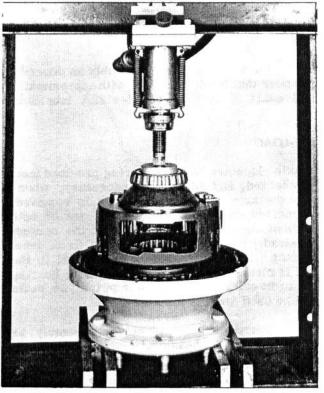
Pressing Planetary Carrier onto Wheel Axle
